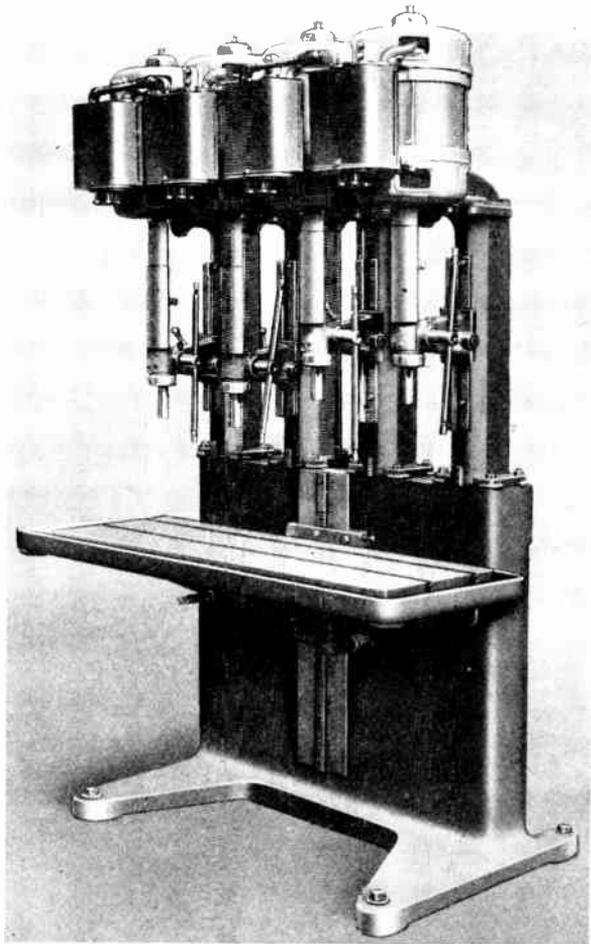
FOUR-SPEED INDUCTION MOTORS WITH DRUM-TYPE STARTERS AND POLE CHANGERS DRIVING MULTIPLE-SPINDLE DRILLING MACHINE. (B.T.H. Co.)
